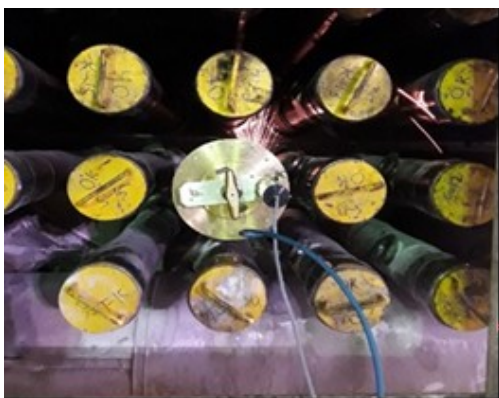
In-situ laser cutting of bellow lip weld joints at KAPS-2 reactor.
